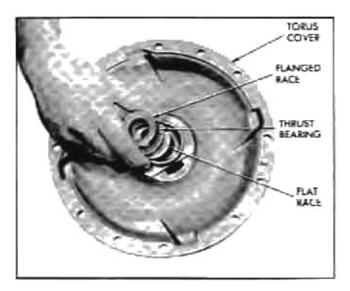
Installing Thrust Bearing and Race in Torus Cover
